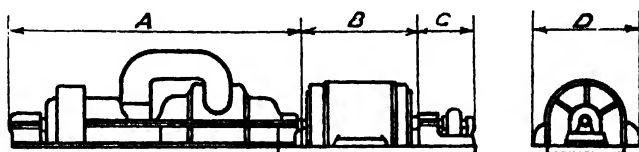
Overall Dimensions of 3,000 r.p.m. Turbo-Alternators.
